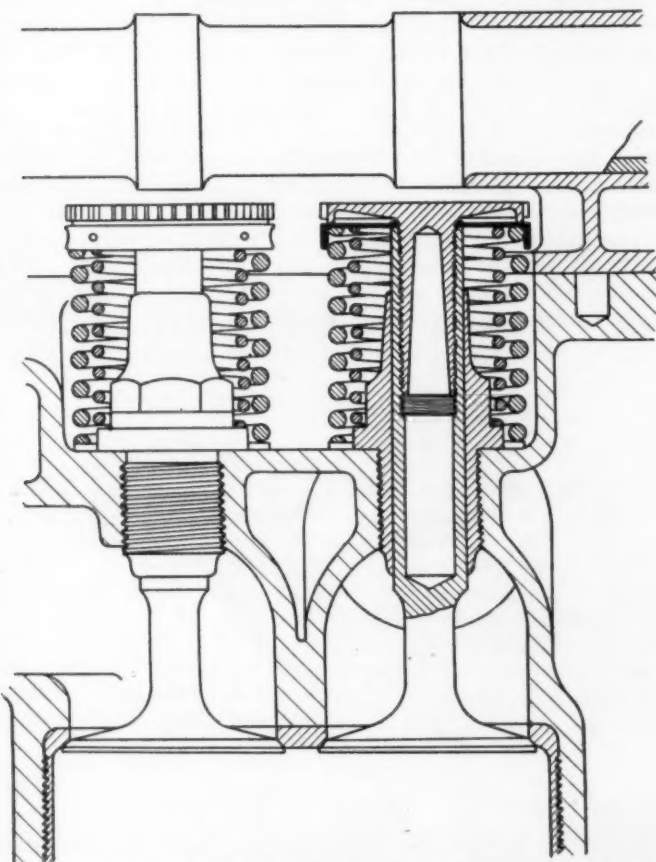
ON THE HISPANO-SUIZA ENGINE A SPECIAL ARRANGEMENT FOR ADJUSTING THE VALVE CLEARANCE BY INSERTING A SCREW IN THE VALVE-STEM IS EMPLOYED
